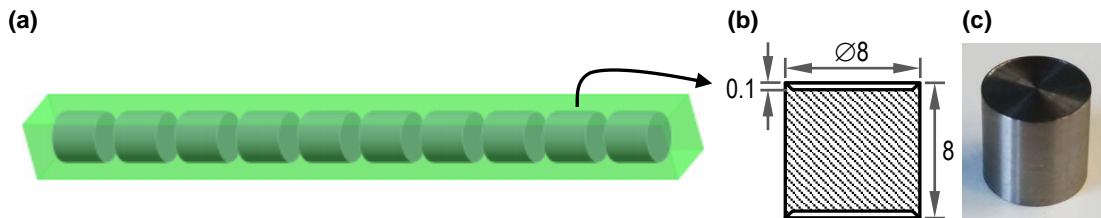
(a) Plan of cutting compression samples from billets, (b) external dimensions of Rastegaev type sample used in the study (see appendix D for detailed drawing) and (c) machined cylindrical compression sample.
